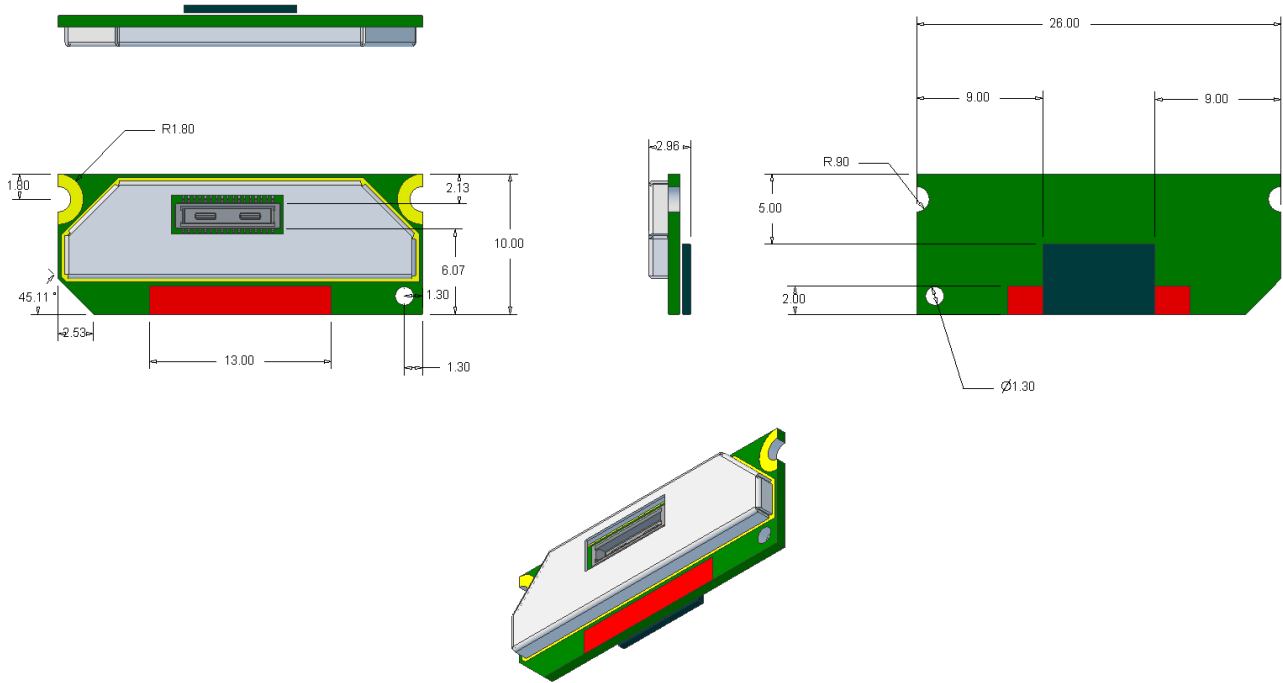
SK62xx-MOD Transceiver Module Dimension (in mm)
